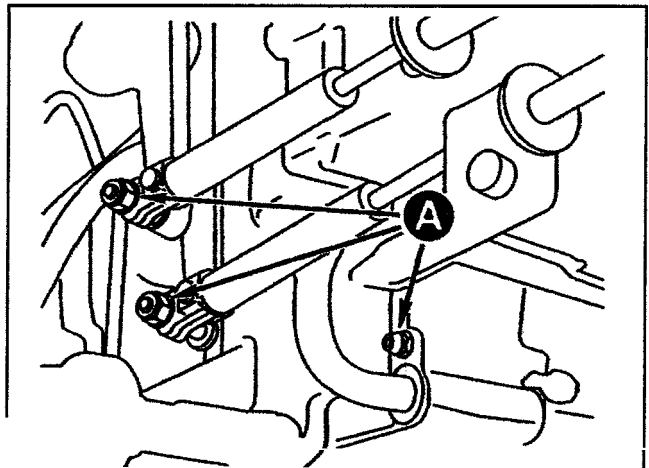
Control and shift cable lubrication points- carbureted 120-300 Hp (2000/3000/4000cc) V4/V6/V8 Motors
